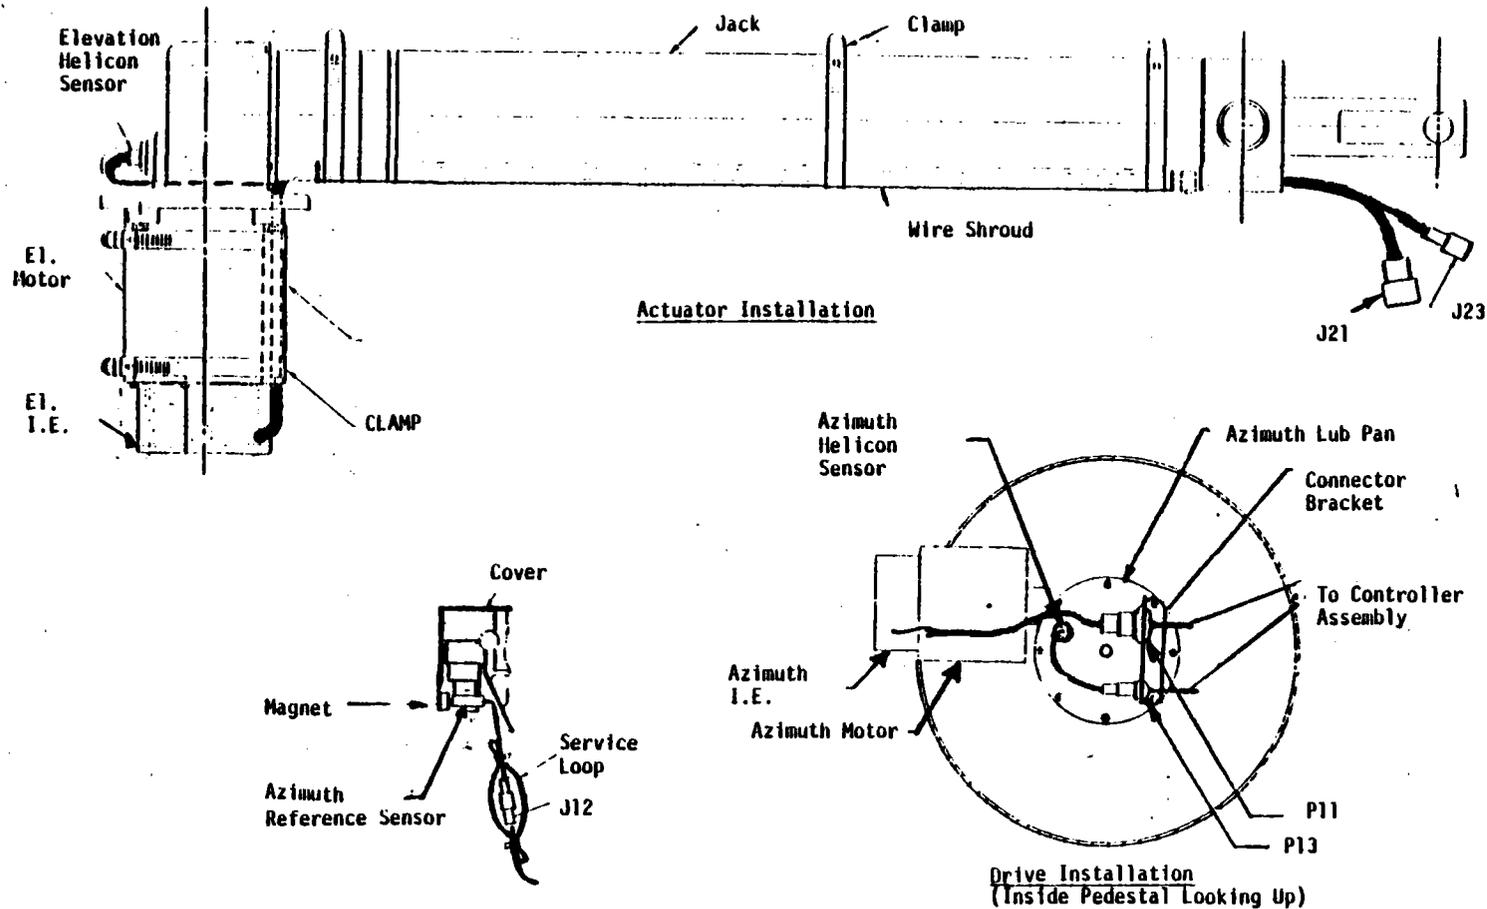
Elevation Jack and Azimuth Drive Electrical Installation
